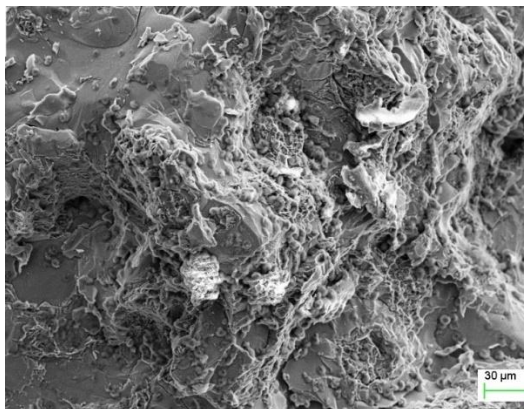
SEM image of tensile fractured of FSW tool speed at 750 rpm
